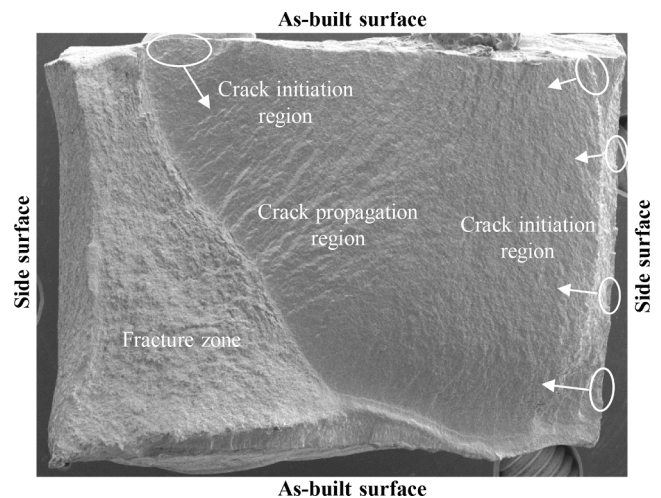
Fracture surface of Coupon AB-90-2.
